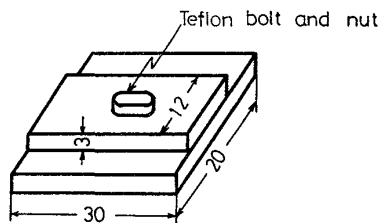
Specimen dimension for crevice corrosion test. (mm)
